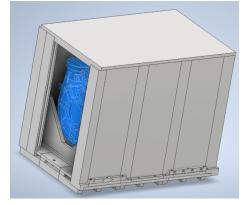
Securing module for the pallet. It is mounted to the pallet with the small holes, and the fastening aids mounted in the big holes, going through the side into the pallet for support.
